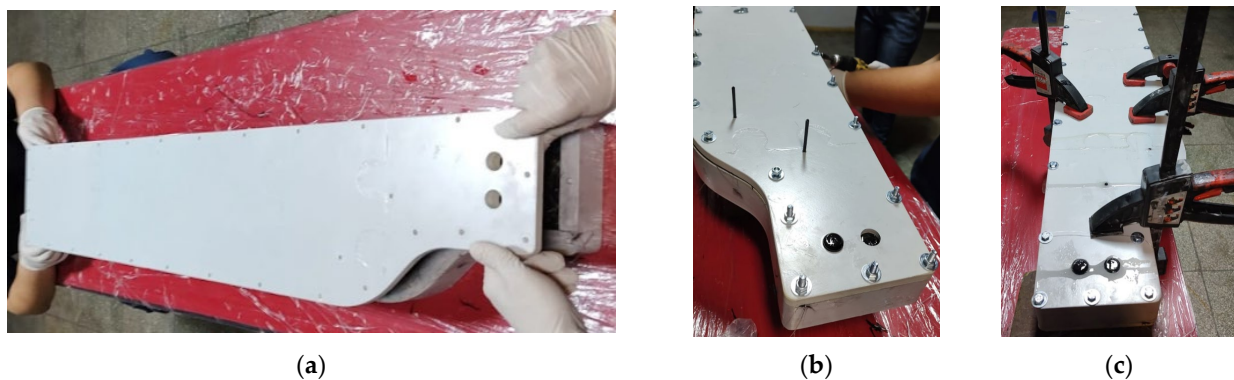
Blade manufacture. (a) Closing the mould after blade lamination. (b) Clamping the two moulds. (c) Use of compressive force to remove excess resin.
